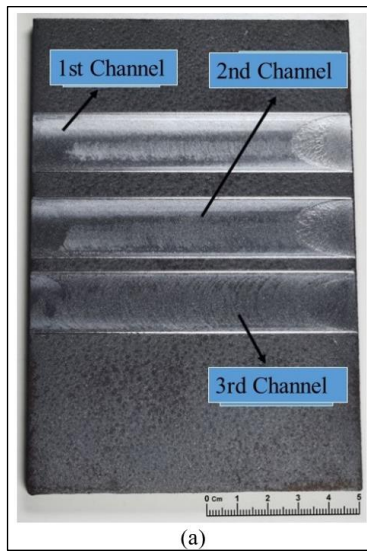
Sample without sealant (nose radius 0,8 mm): (a) Machined surfaces.
